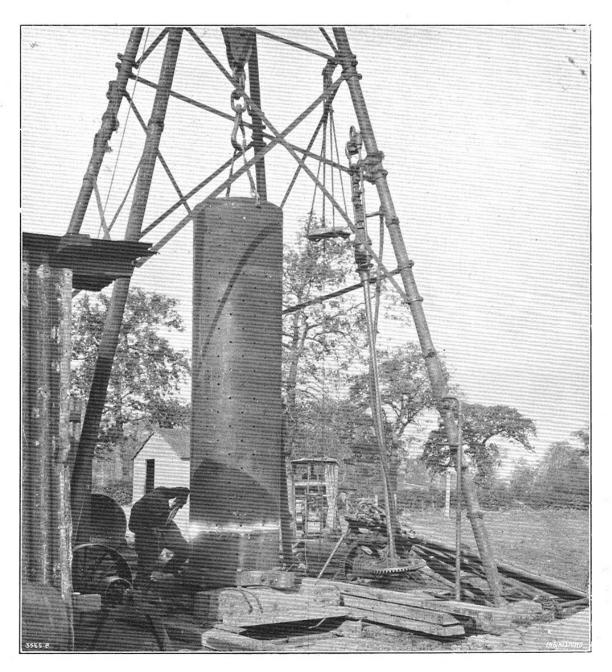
Welding Lengths of 40-In. Perforated Lining Tube.
